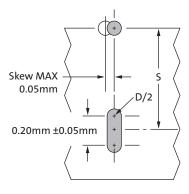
Embossed Carrier Dimensions (32mm and 44mm tape only)
